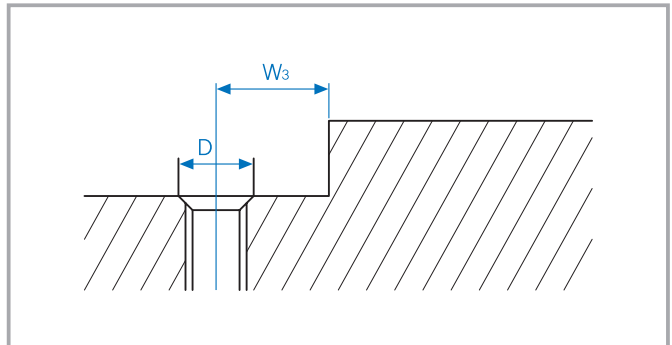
Dimensional tolerance between contact datum plane and mounting hole
